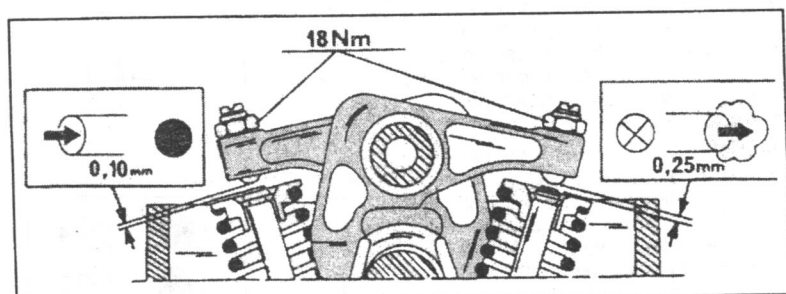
Insert feeler gauges of the thickness shown between the ends of the valve stems and the rocker arm pads. Tighten the locknuts to 1.8 kgm.
